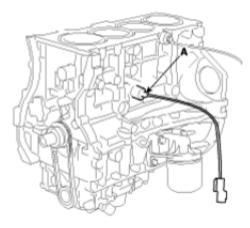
Identifying Oil Pressure Sensor Courtesy of HYUNDAI MOTOR CO.
